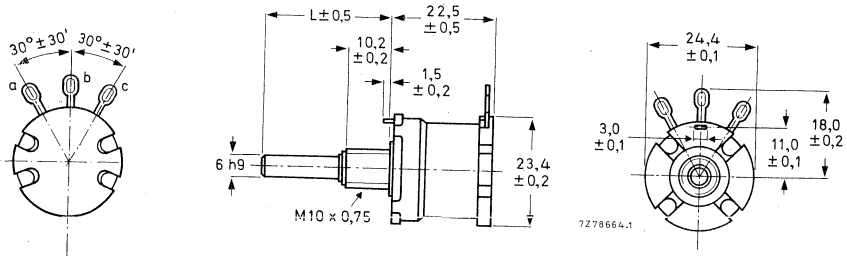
Potentiometers 2322 003 with plain spindle. The spindle length L is 17, 20, 30 or 60 mm.
